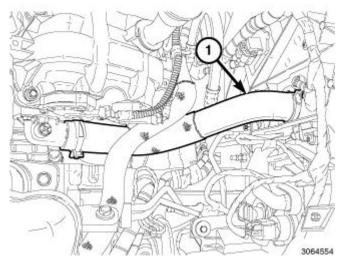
Upper Radiator Hose Courtesy of CHRYSLER GROUP, LLC
